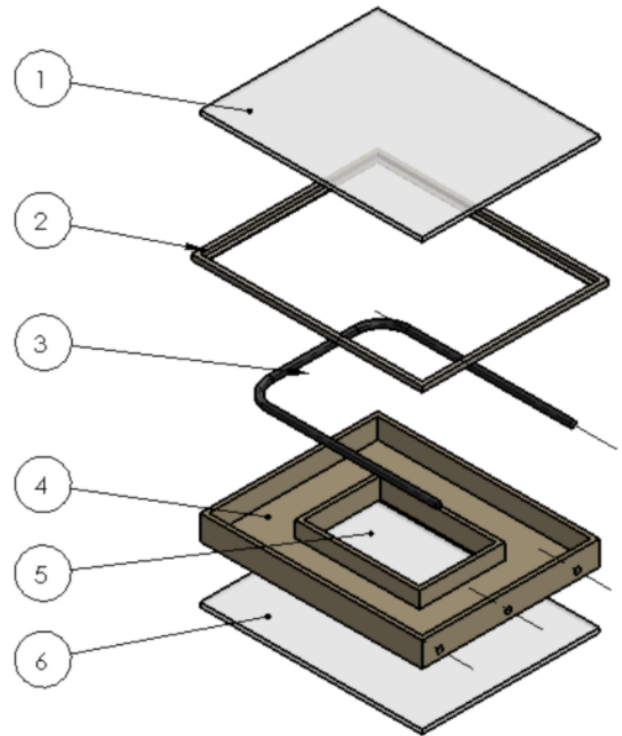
Exploded view of SOLIDWORKS drawing of heated water pump with item descriptions¹
